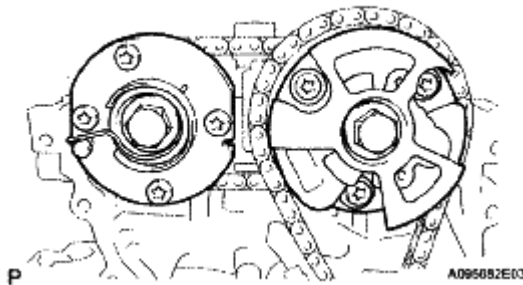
Identifying Camshaft Timing Gear Setting Position
